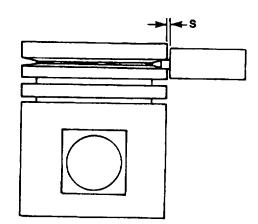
Axial Clearance for Trapezoidal Piston Ring
